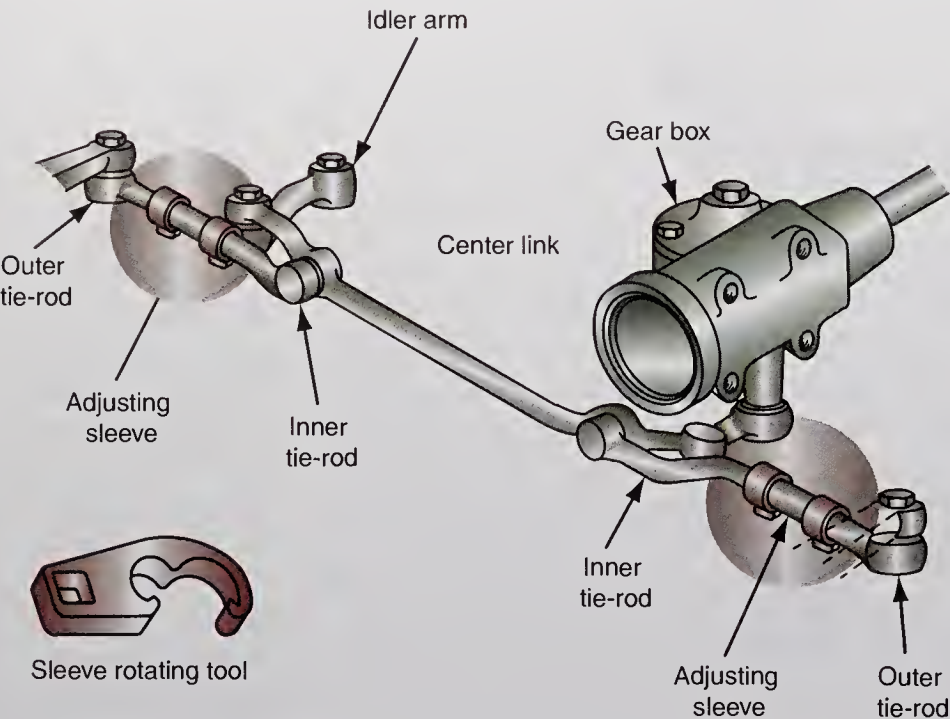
Rotating tie-rod sleeves to adjust front wheel toe.
